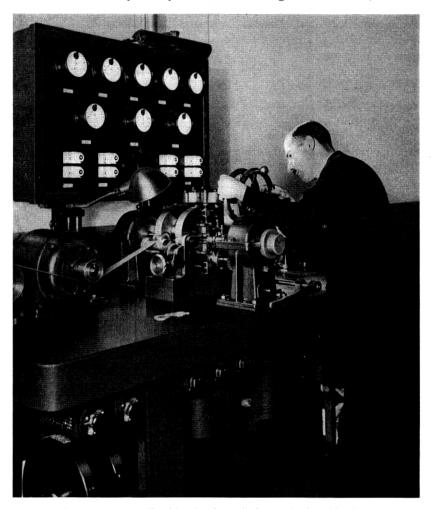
Twenty roll cold-reduction mill for producing thin sheet materials for experimental studies.
